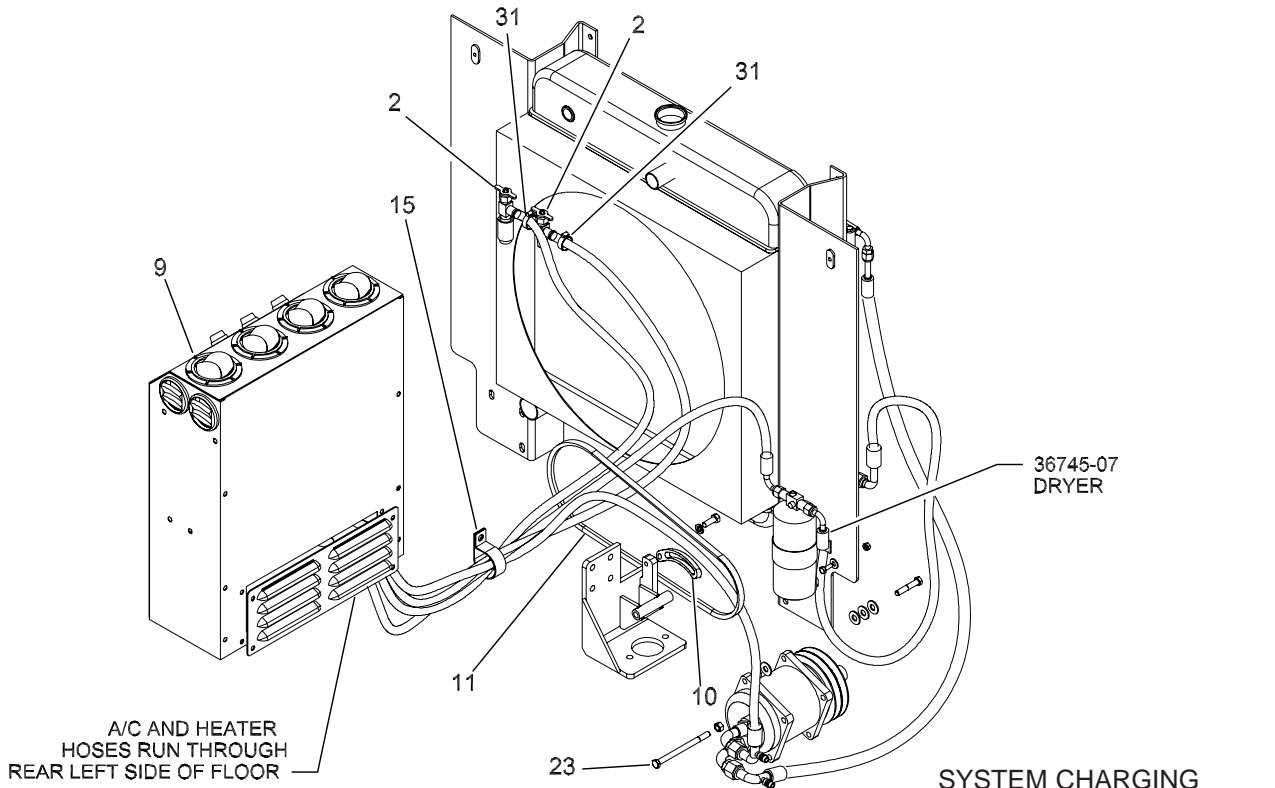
RADIATOR/COOLER ASSEMBLY
